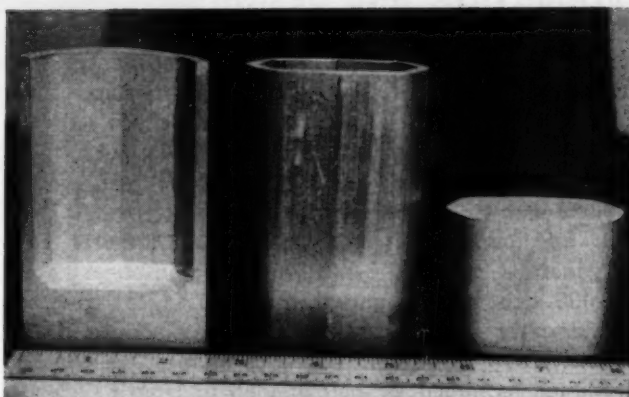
Close-up view of the octagonal can shown in Fig. 2. Axial section is shown on the left and starting forging slugs on the right
